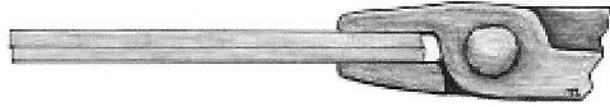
Bars for practice weld—no alignment of scarfs.
